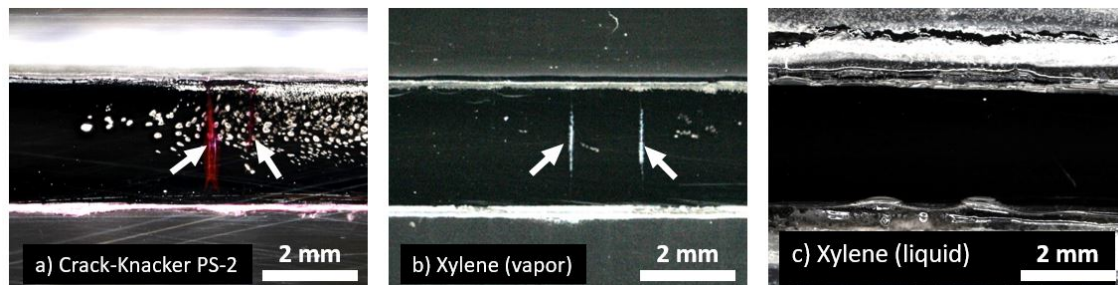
Top view of weld seams created with a laser power of 6,6 W, 980 nm and a feed rate of 10 mm/s; Crack initiating media: (a) Crack-Knacker PS-2, washed after 24h; (b) Xylene vapor, 24h exposure; (c) liquid xylene, single application.
